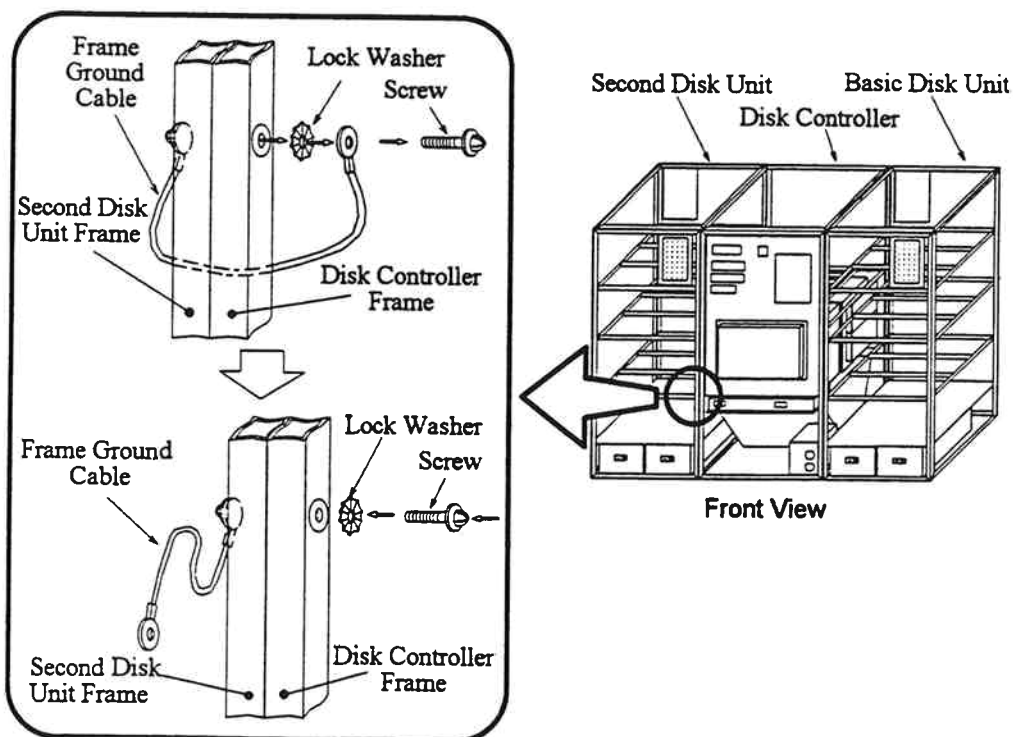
Removal of Frame Ground Cable
